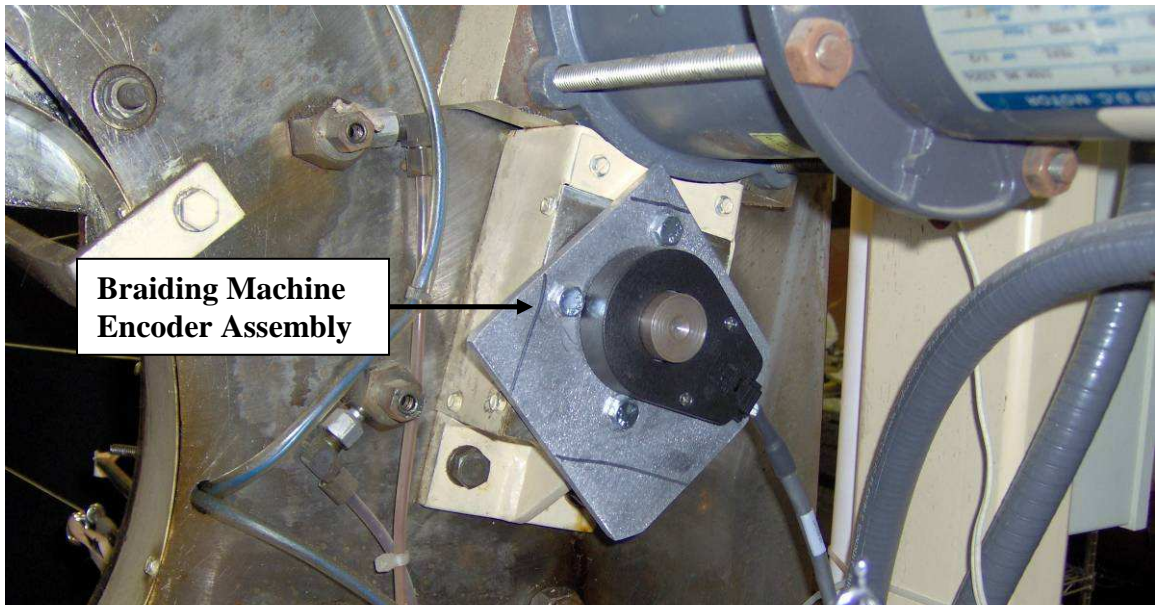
Encoder installed, mounting bracket, shaft extension
